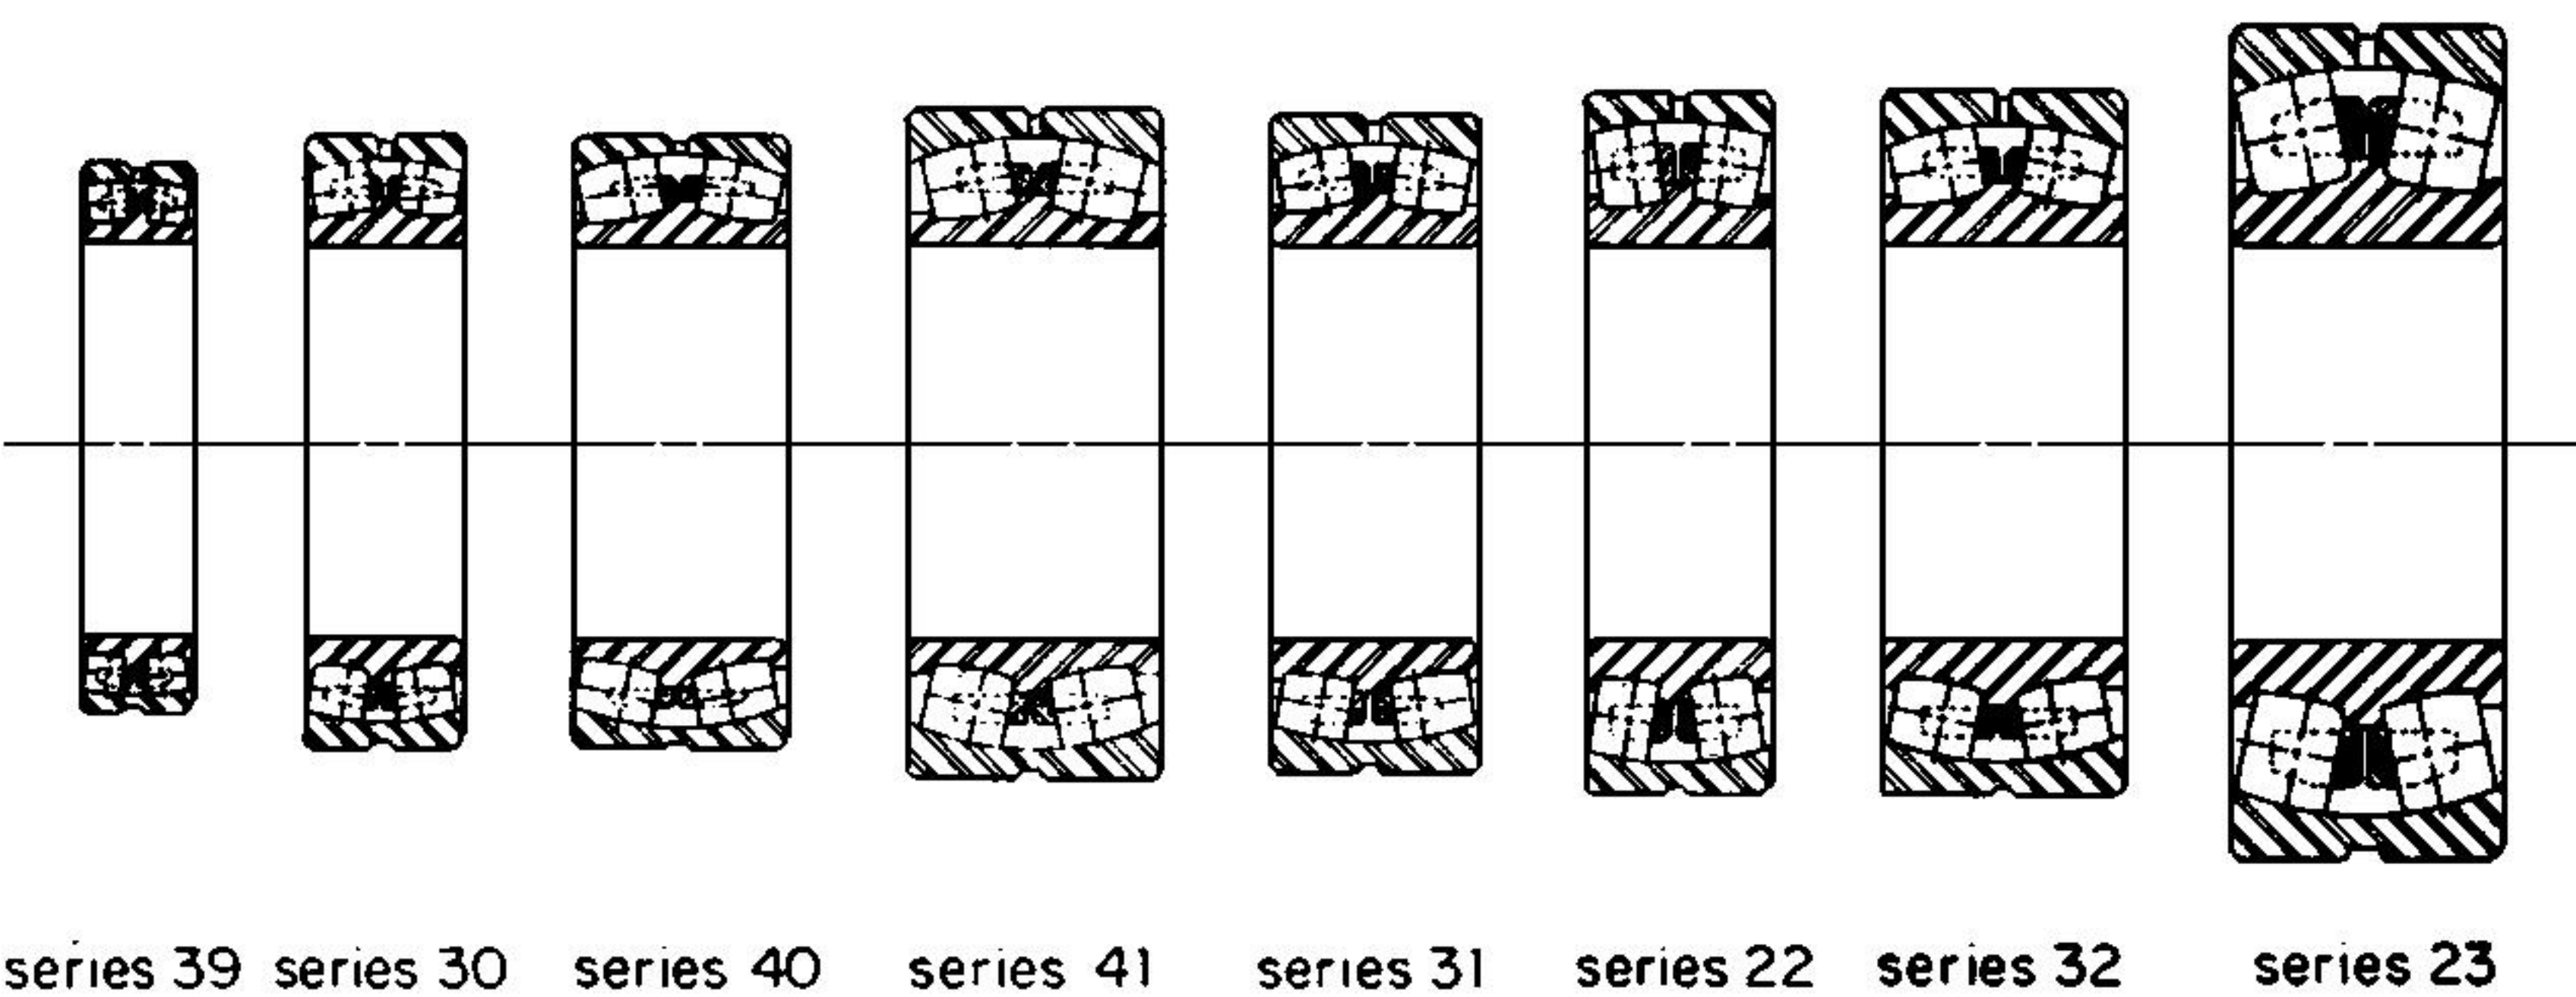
Spherical roller bearings of different diameter series with common bore size.
